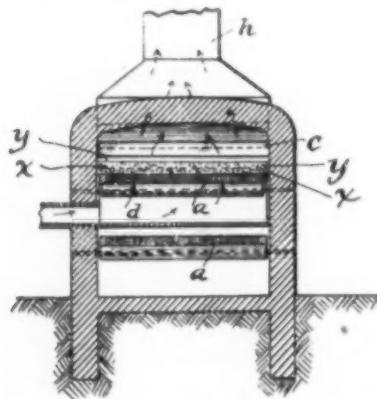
CROSS-SECTION OF SINTERING MACHINE
